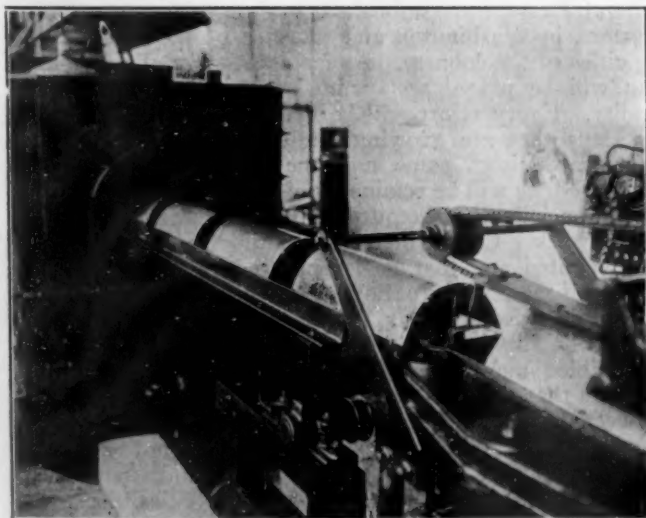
THE SHEET-ARCHING MACHINE AND FURNACE CONVEYORS SHOWING BOWED SHEETS ON THEIR SUPPORTS ENTERING THE FURNACE.
